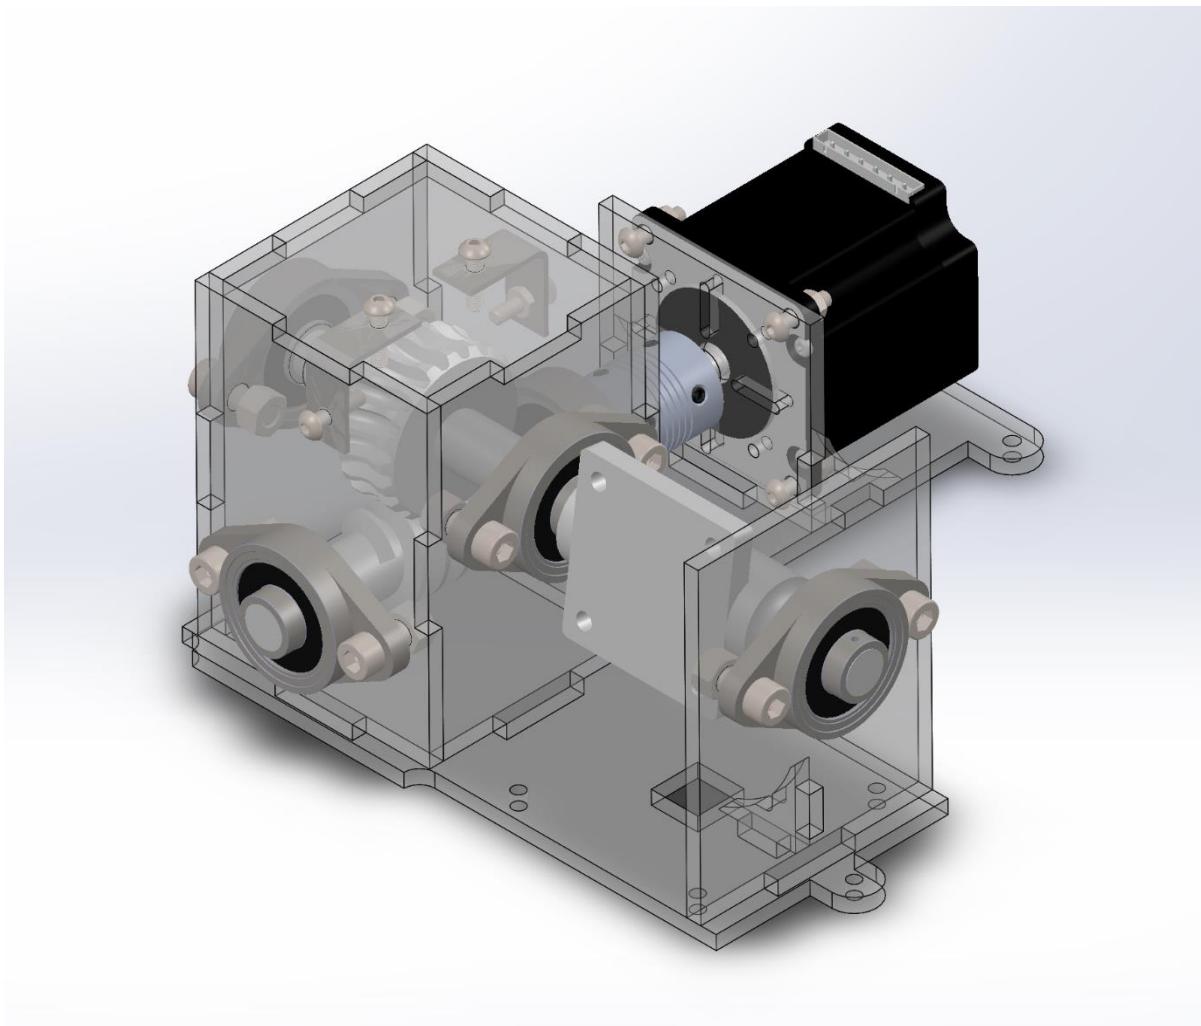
Motor to Chassis Connection (No Adapter Modelled)
